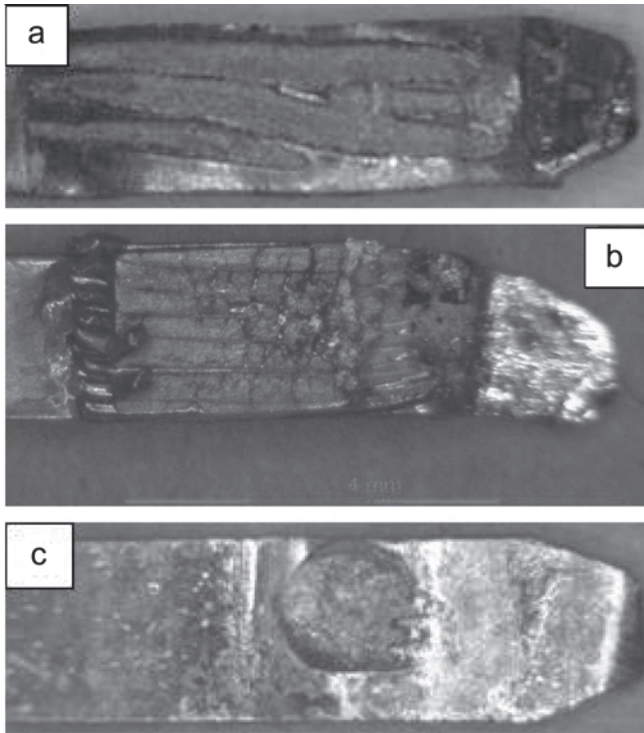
Macroscopic pictures of welded joints produced with different welding methods after peel test: compacting and resistance projection welding (a), resistance projection welding (b), laser beam welding (c)
